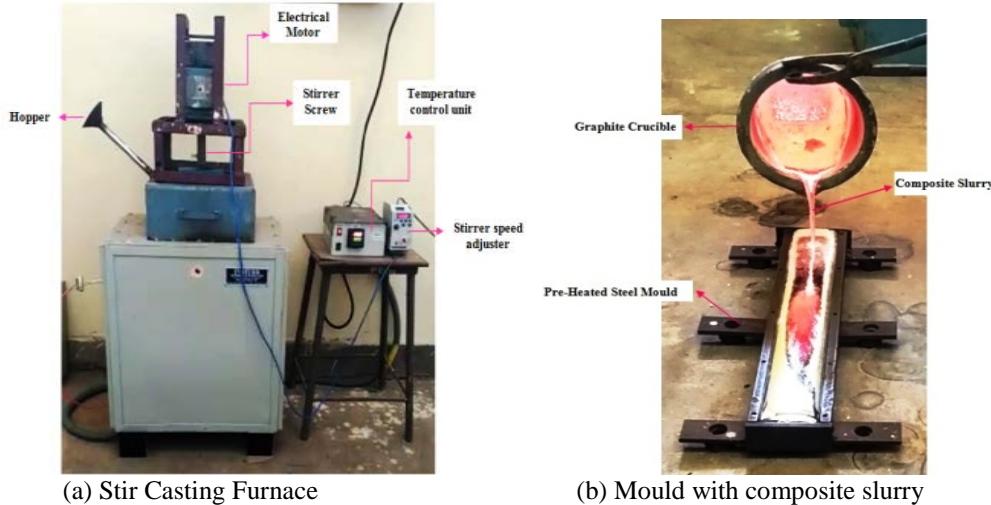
Fabrication of hybrid MMC by using stir casting furnace
